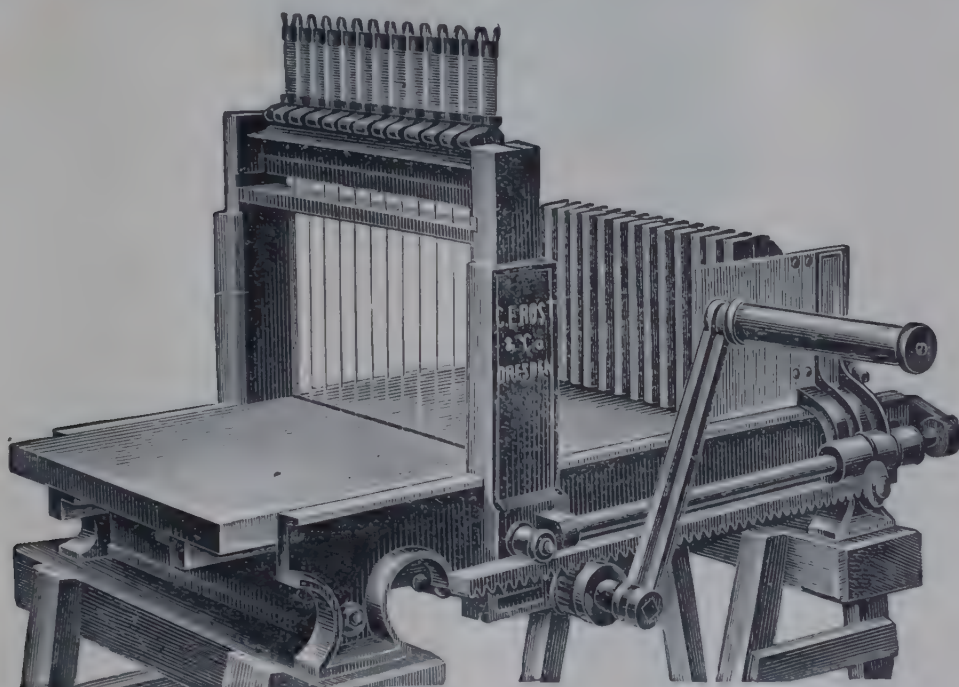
Bar-Cutting Machine. (Rost & Co., Dresden.)
